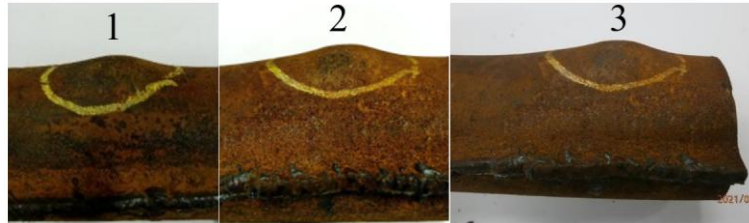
Bulging 1, 2 and 3 on tube of furnace boiler
